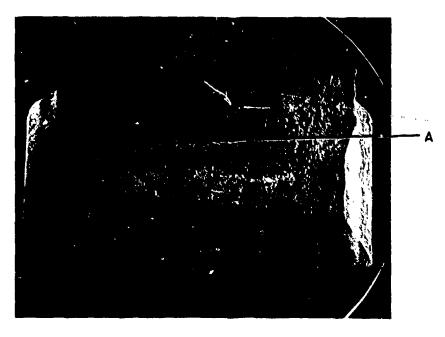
Tensile fracture surface of an A-514 steel plate specimen, 8x.
